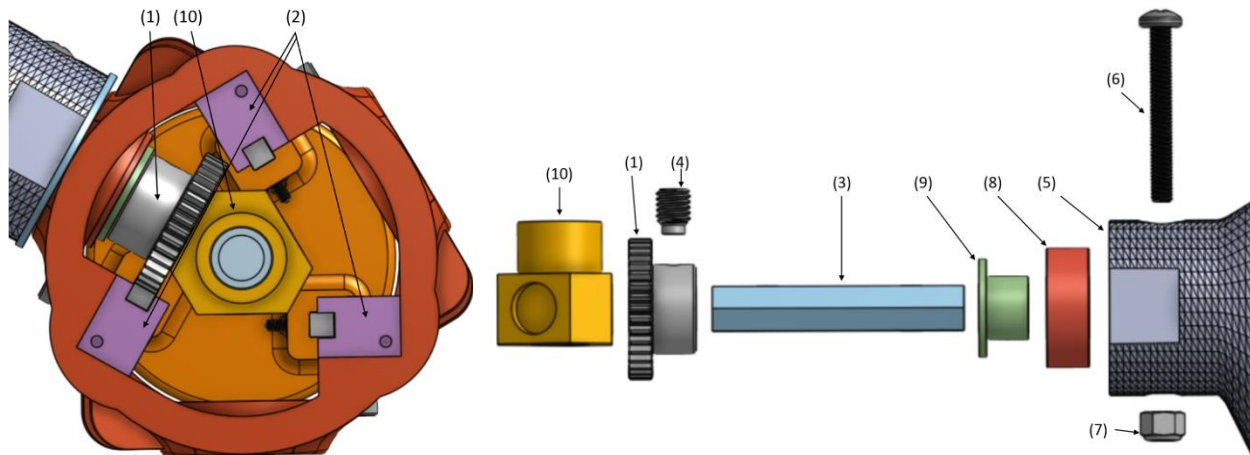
Internal hub components (left) and exploded spar assembly (right)
